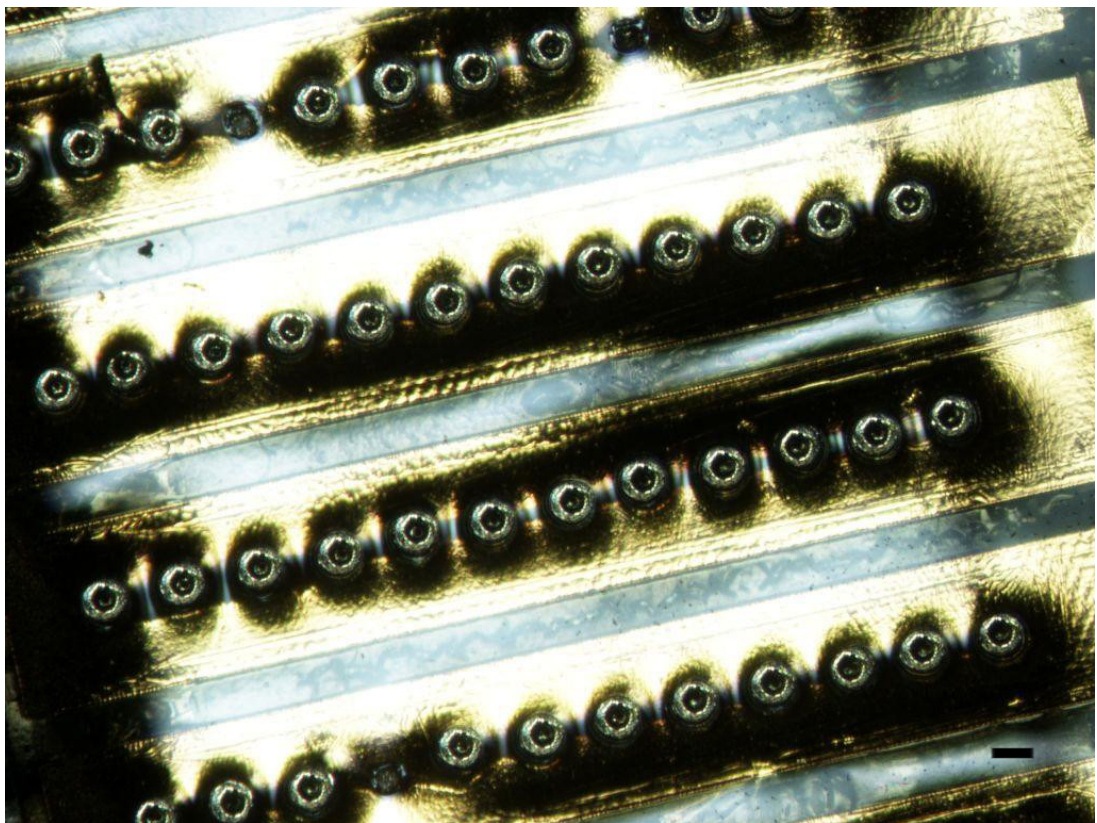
Rows of ball bonds acting as micro-rivets holding the SPNI to the PCB and making good electrical contact between the two. Scale bar is 60 μm .
